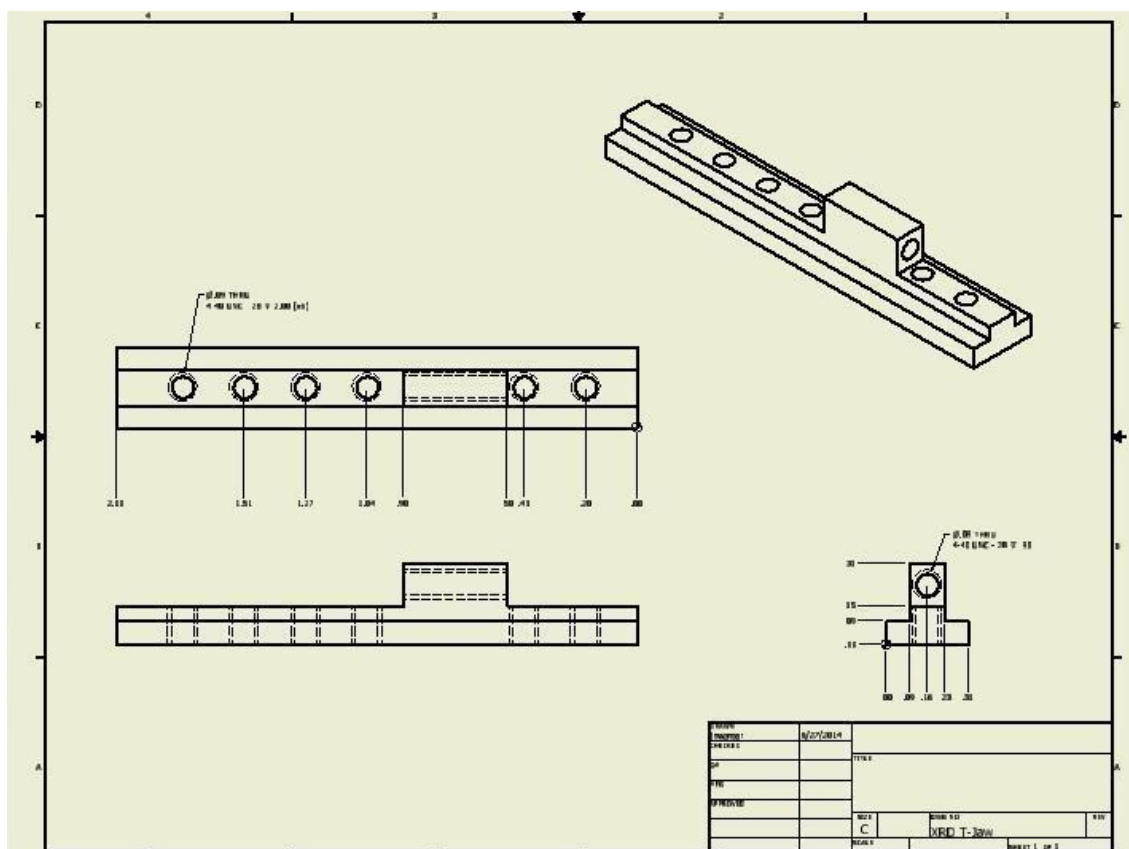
Blueprint for designed fixture to hold samples on mounting surface.
